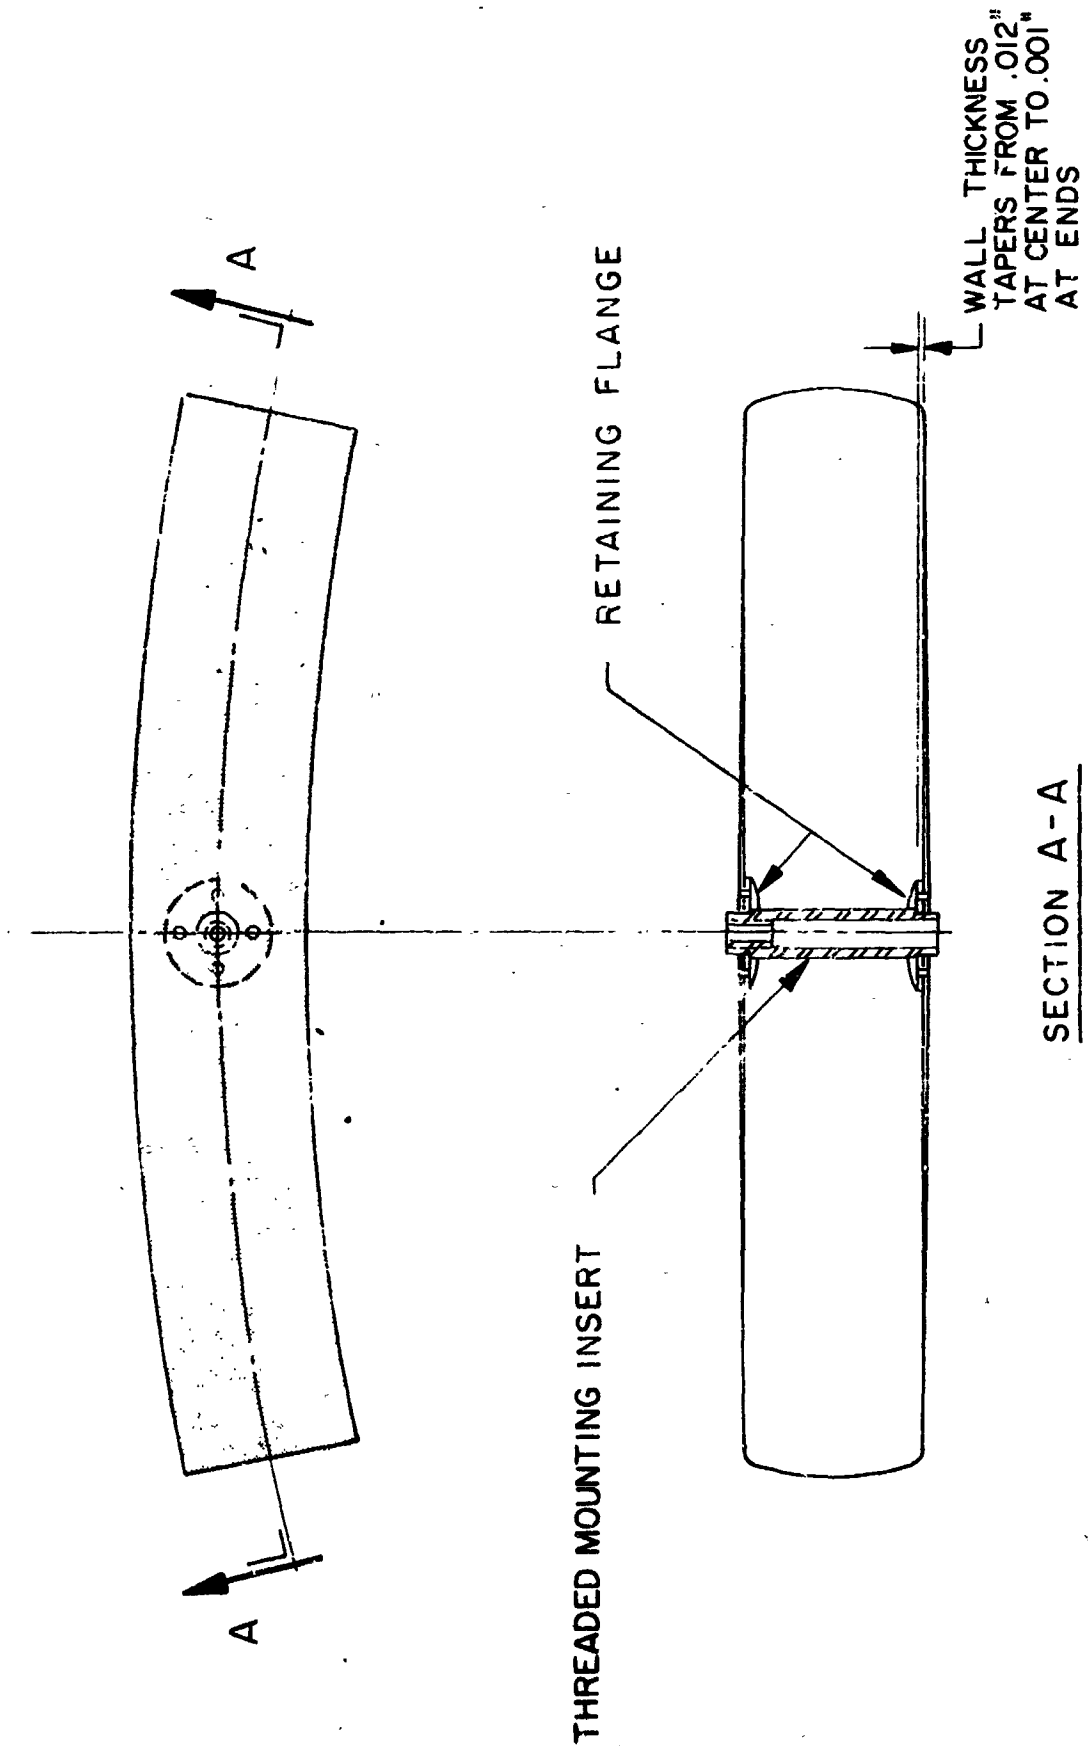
ELECTROFORMED MOUNTING SEGMENT
